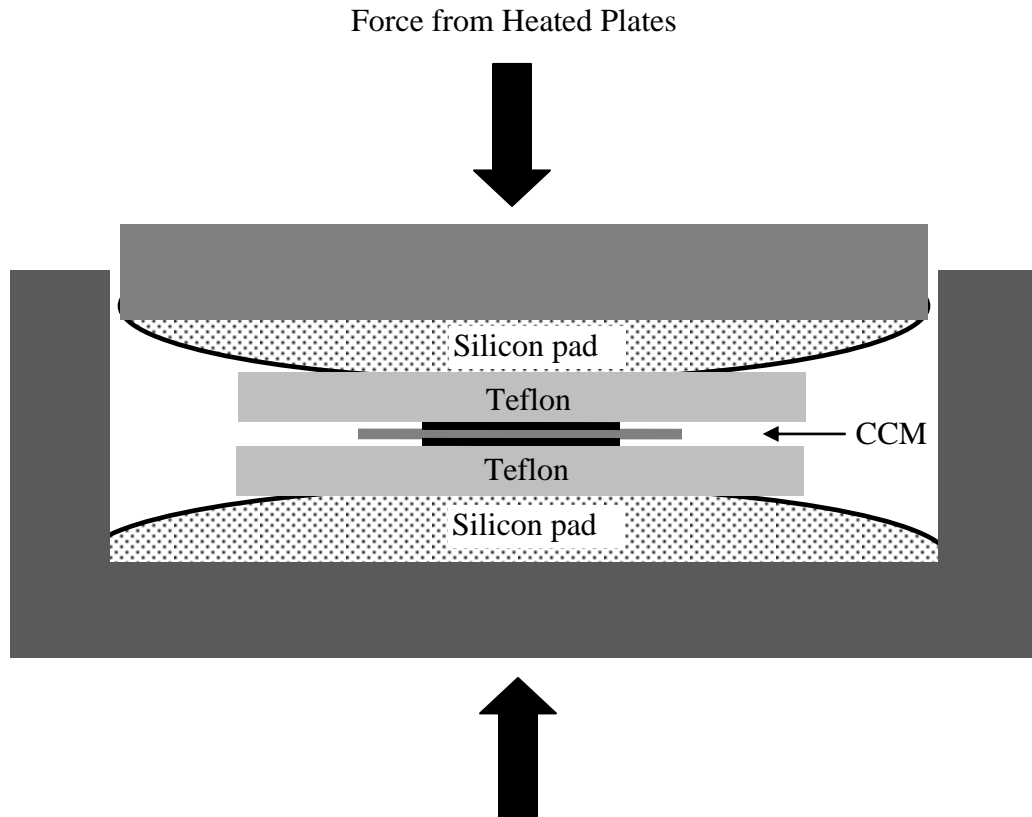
Schematic of hot-pressing set-up. Gas diffusion layers are physically pressed onto the hot-pressed CCM later when the CCM is loaded into the fuel cell test fixture.
